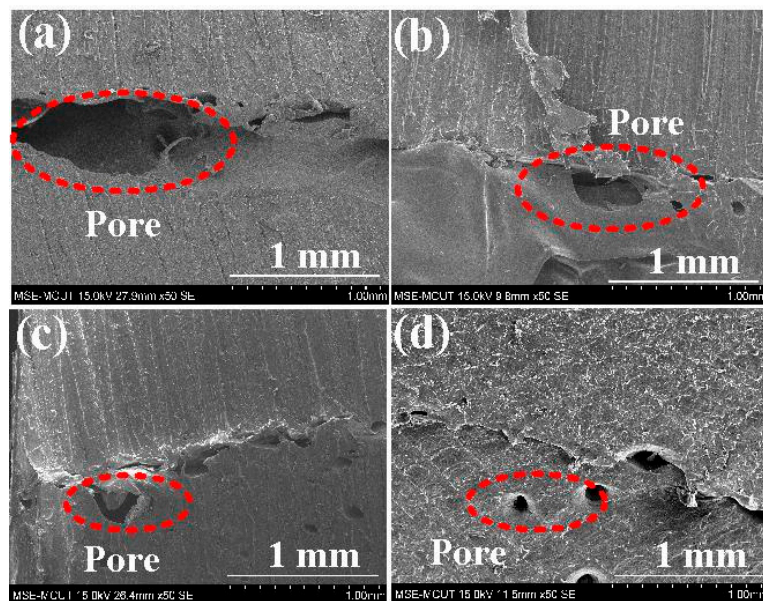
SEM micrographs of fracture surfaces of welded parts for RFW at (a) 1000, (b) 2000, (c) 3000, and (d) 4000 rpm.
